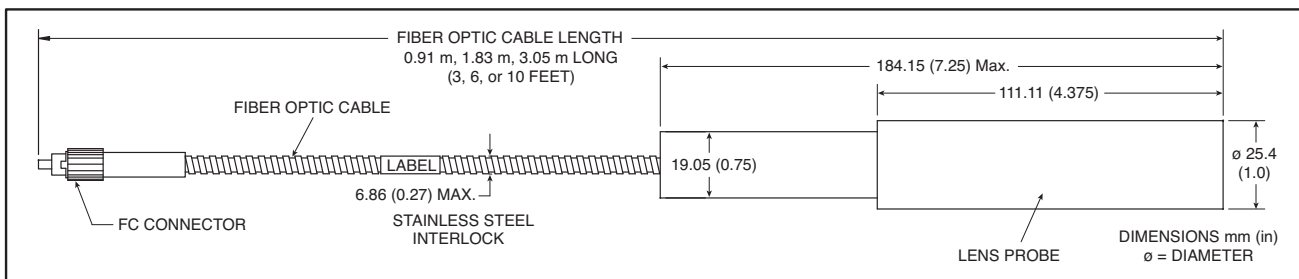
General Dimensions, Fiber Optic Lens Probe Assembly
